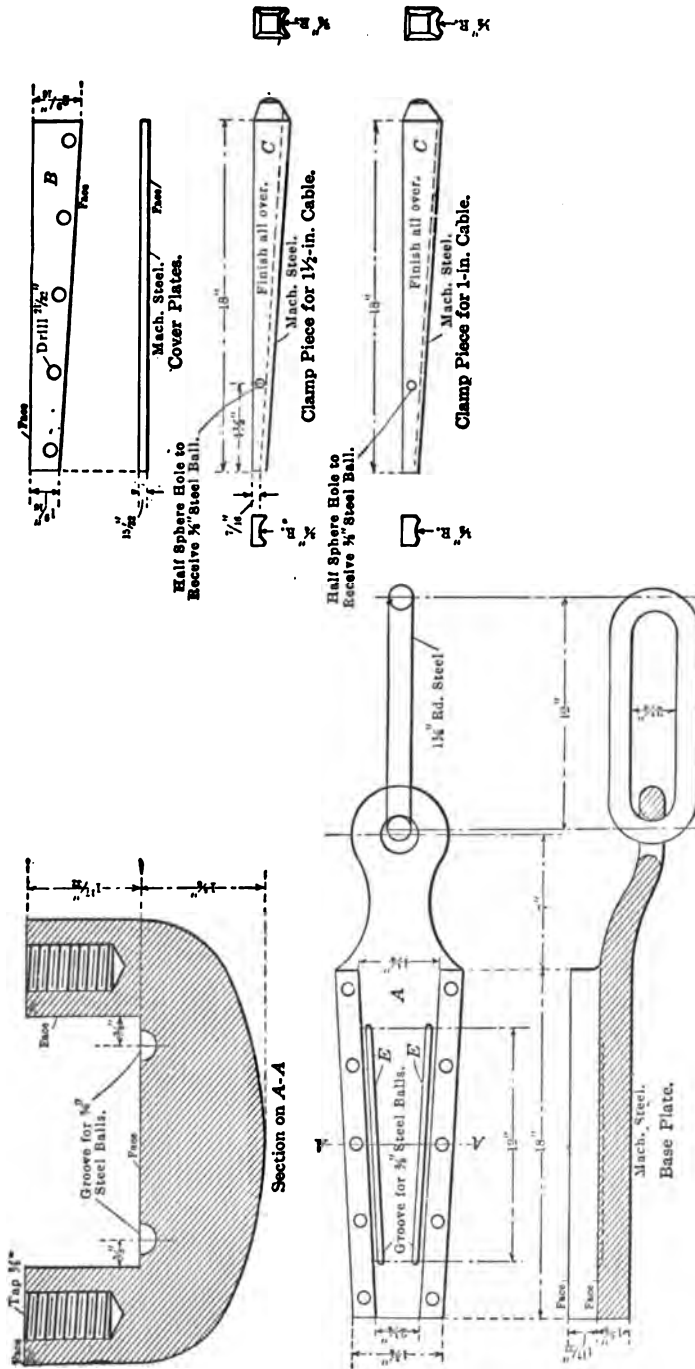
DETAILS OF THE RATTLE CLAMP FOR TRAMWAY CABLES.
